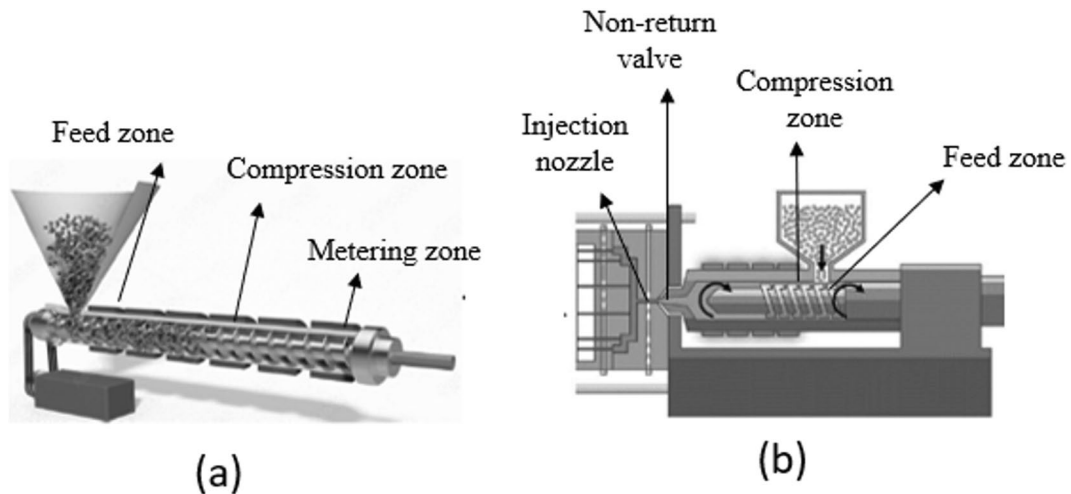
a Schematic representation of parts of a single-screw extruder and b schematic representation of parts of an injection molding machine
